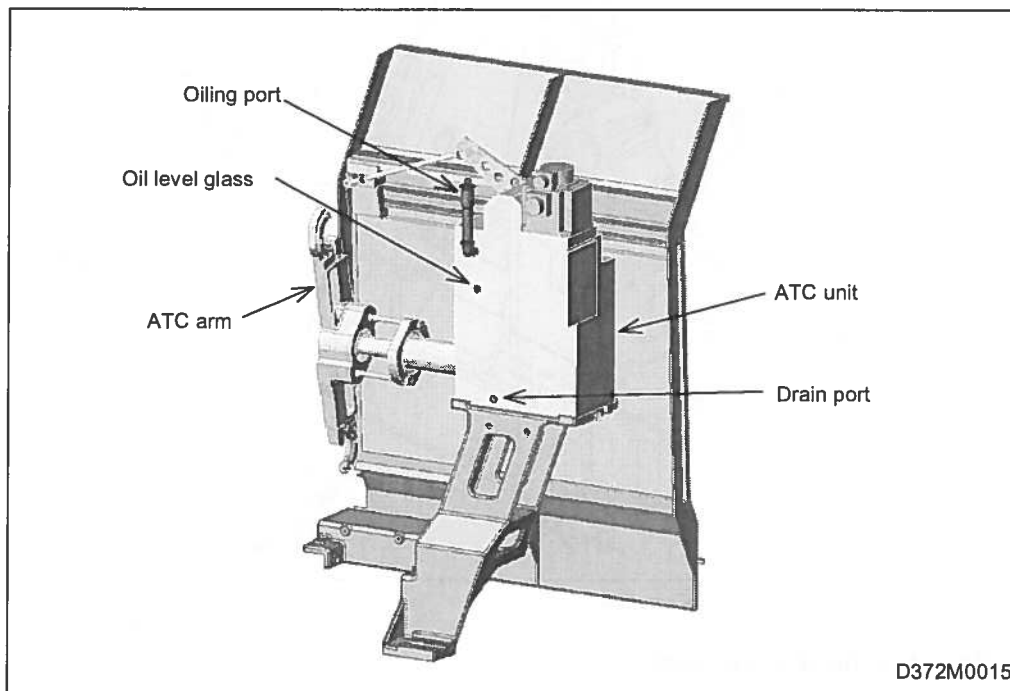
Oil level inspection and oil replacement for the ATC unit
